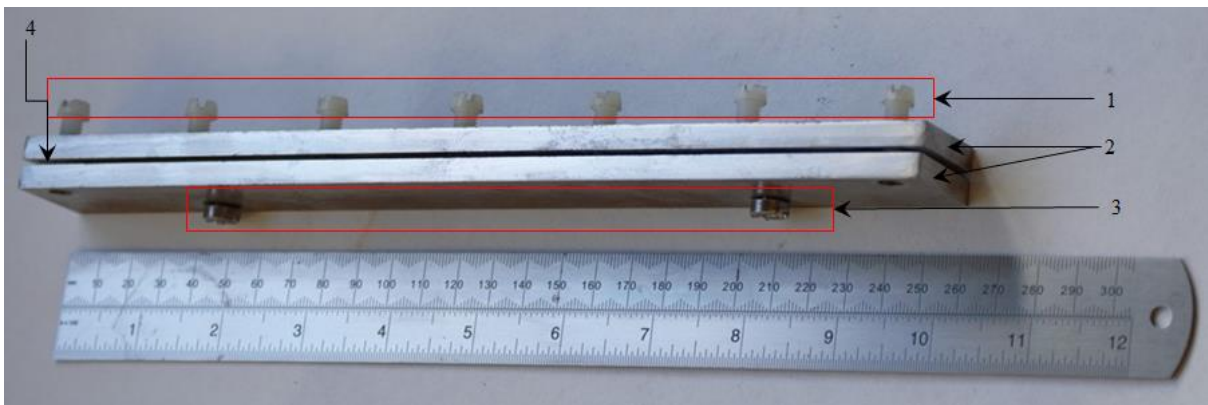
Sample holder showing two metal plates with sample secured in between: (1) Five plastic sample clamp screws; (2) Two customised fabricate metal plates; and (3) Two housing bolt clamp.
